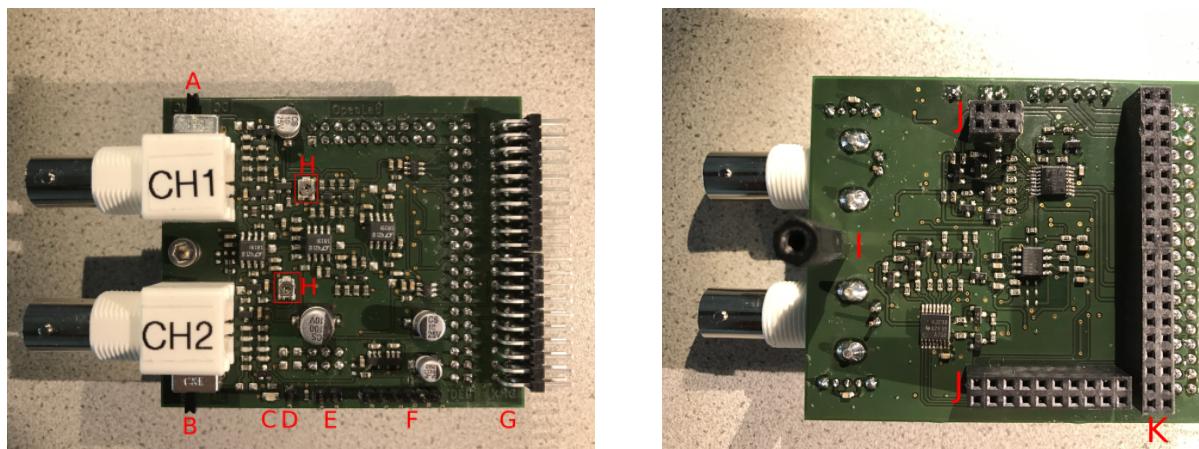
OpenLab Oscilloscope Hardware PCB V2/3
